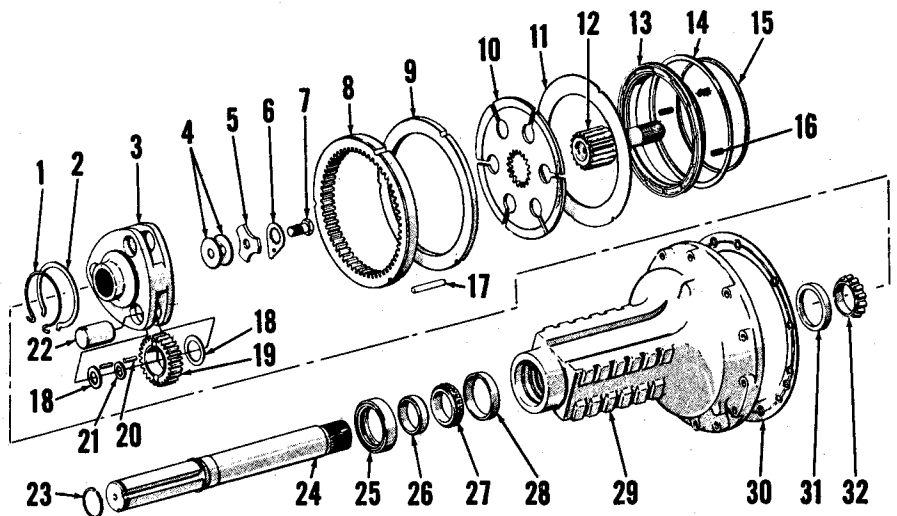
Exploded view of final drive and rear axle assembly. Hydraulic brake piston (13) is fitted in side of rear axle center housing. Three pins (17) are fitted in mating holes in axle housing (29) and rear axle center housing and hold the planetary ring gear (8), brake outer disc (9) and brake inner disc (11) stationary. Planetary sun gear teeth are machined on outer end of inner shaft (12). Planetary gear carrier (3) is splined to inner end of wheel axle shaft (24). TW-30 models are equipped with four planetary gears and two brake inner discs (11) and two brake friction discs (10) per side.
